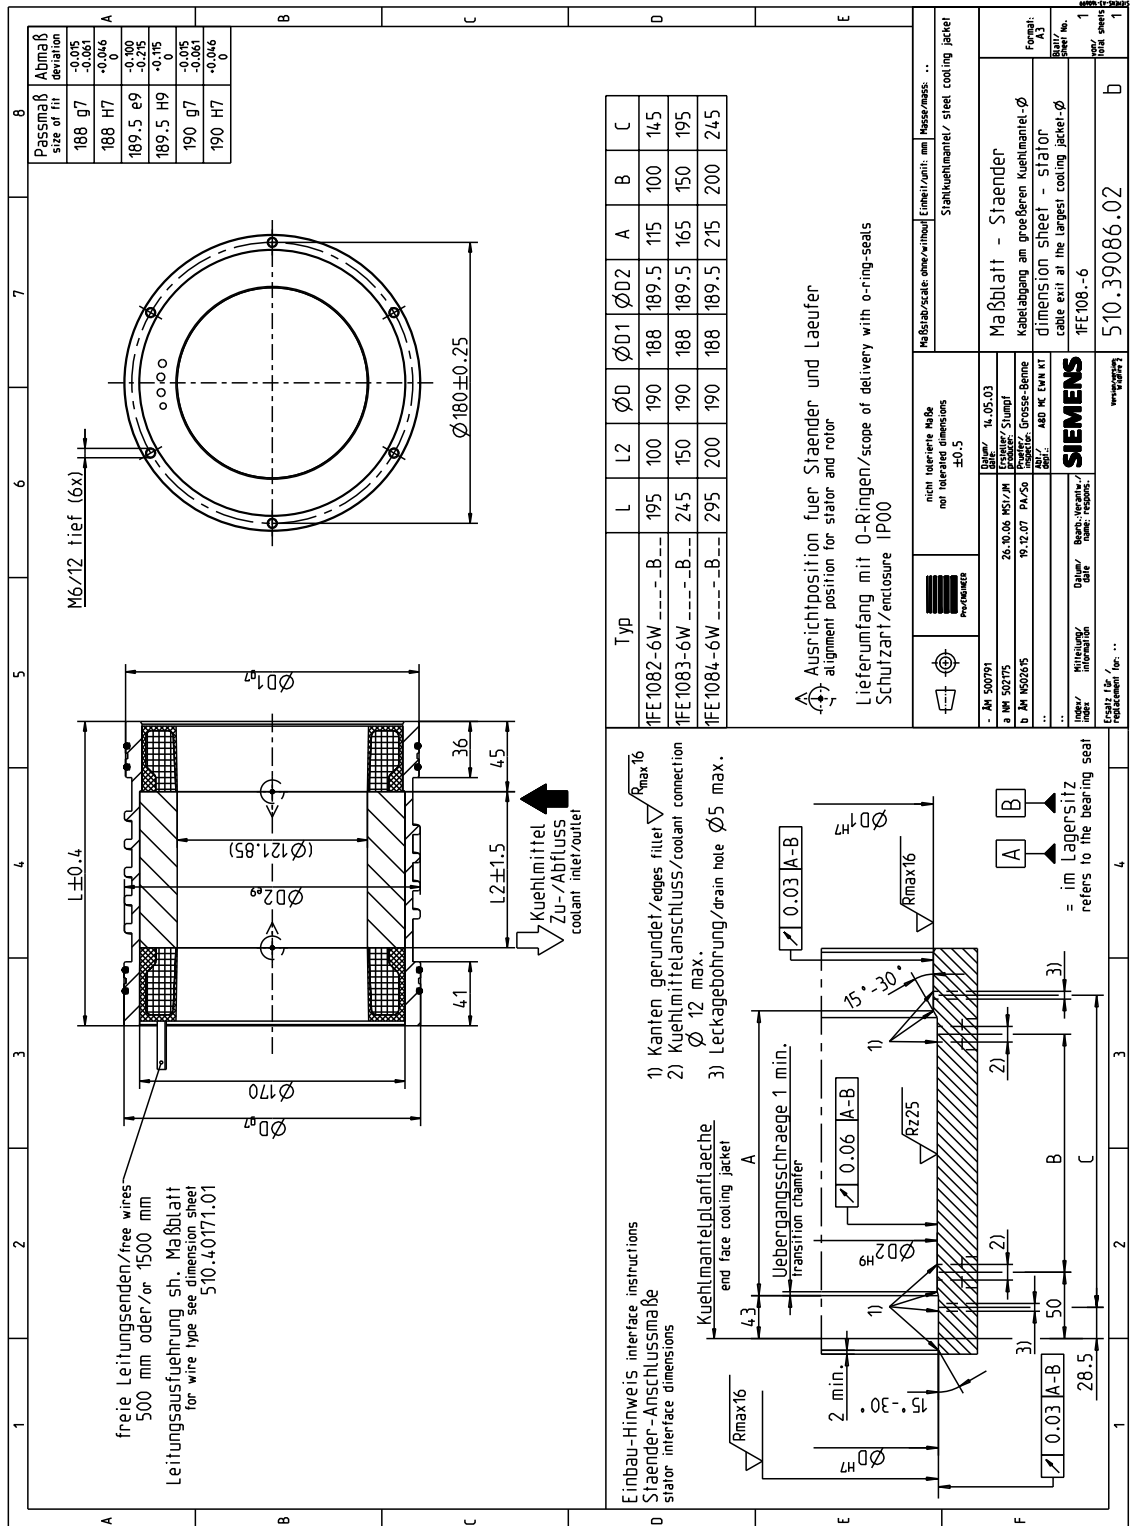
1FE108□-6, stator with cooling jacket, cable outlet at the larger cooling jacket diameter
